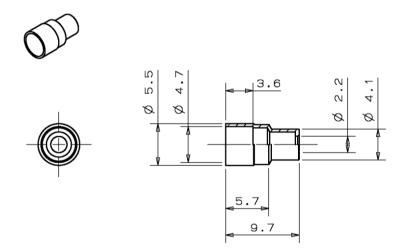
3-2 Crimping Ring (for ø 2 mm cord)
